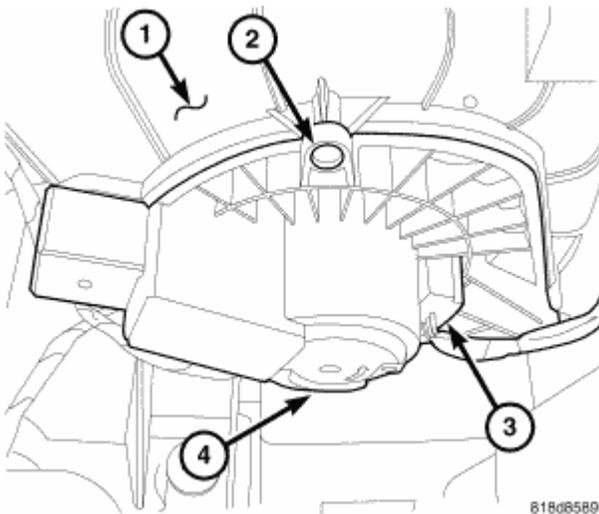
HVAC Housing, Screws, Instrument Panel Wire Harness Connector & Blower Motor
